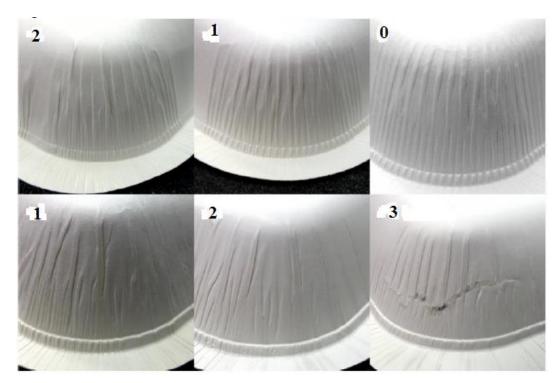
Visual inspection of corners guide figure modified (Leminen et al., 2013).
